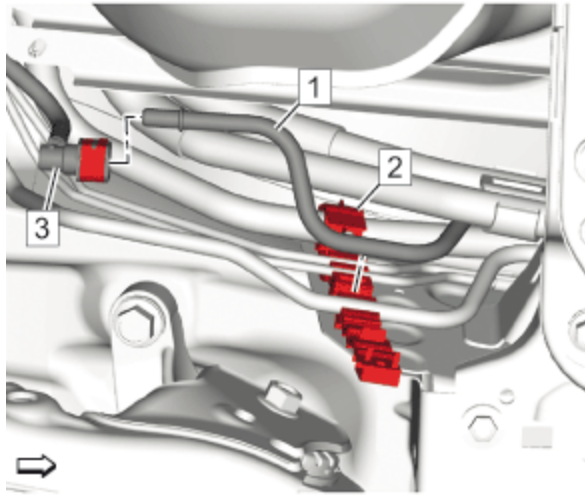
Fuel Feed Pipe, Fuel Pump Fuel Feed Hose And Retainer
